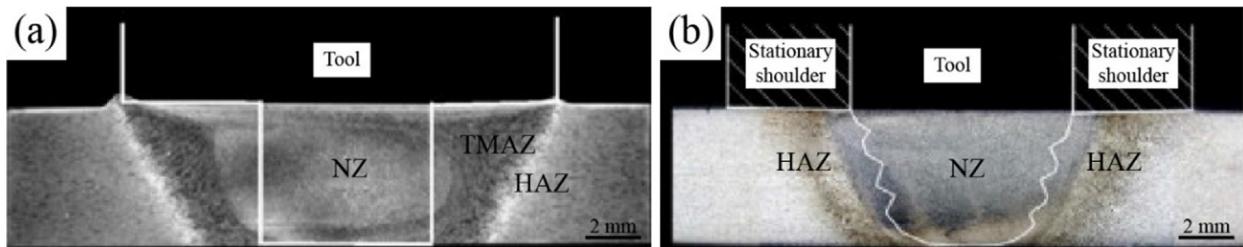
Transverse cross-sections of a friction stir welded AA6061-T6 butt joint, using (a) conventional rotating shoulder and (b) stationary shoulder. A schematic of the tools applied is showed on top of the cross-section. The figure shows the reduction of the TMAZ and HAZ in SSFSW as compared to FSW. Image adjusted from Meng, Huang, Cao, *et al.* [95].
